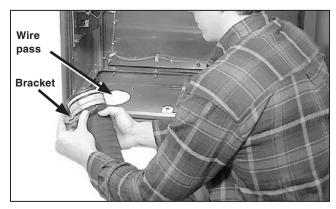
Place the holding brackets in the grooved channel of the conduit.
